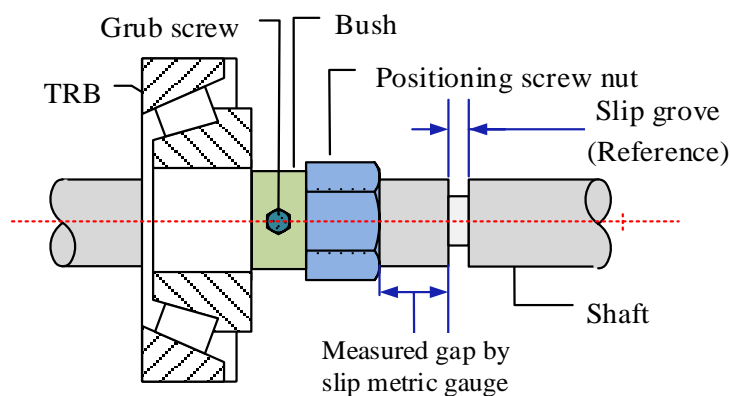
Sketch diagram of the clearance adjustment mechanism
